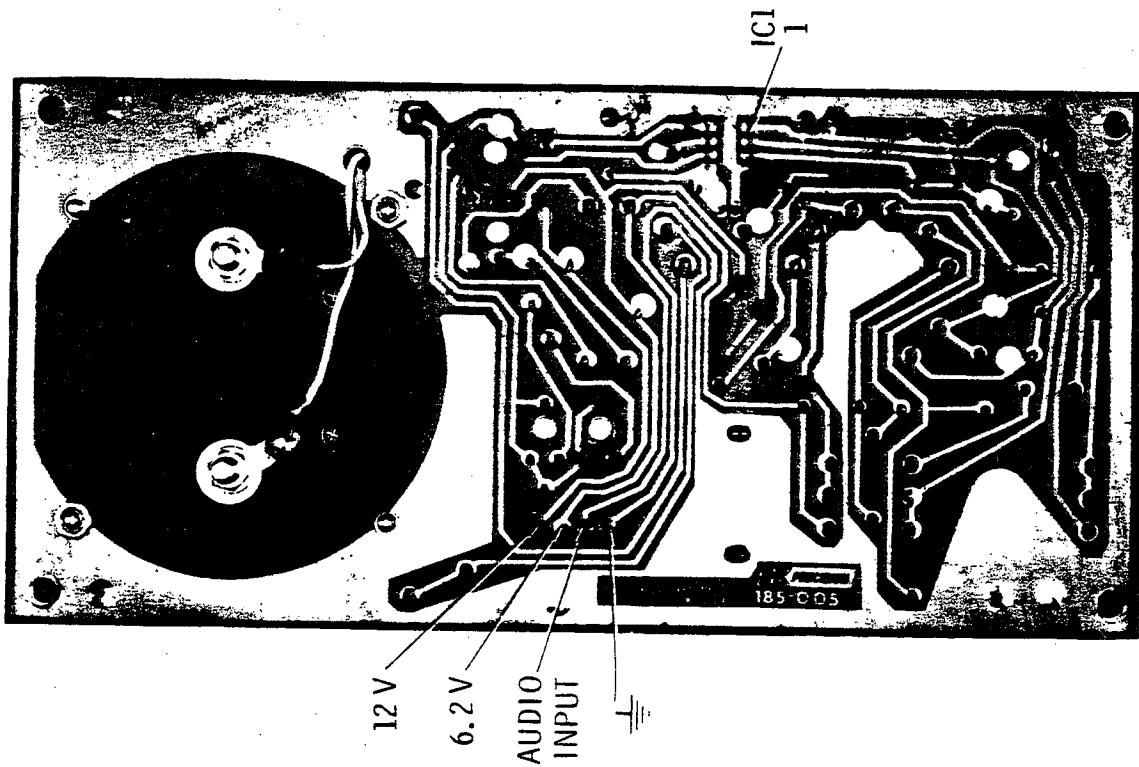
Audio Printed Circuit Board, Bottom View, Voltage Points.
